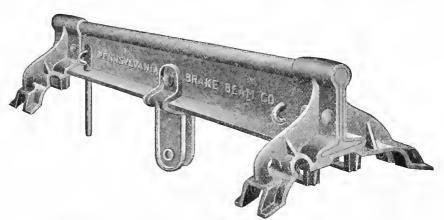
Standard Deck Beam Brake Beam, Drop Forged Fulerums.
